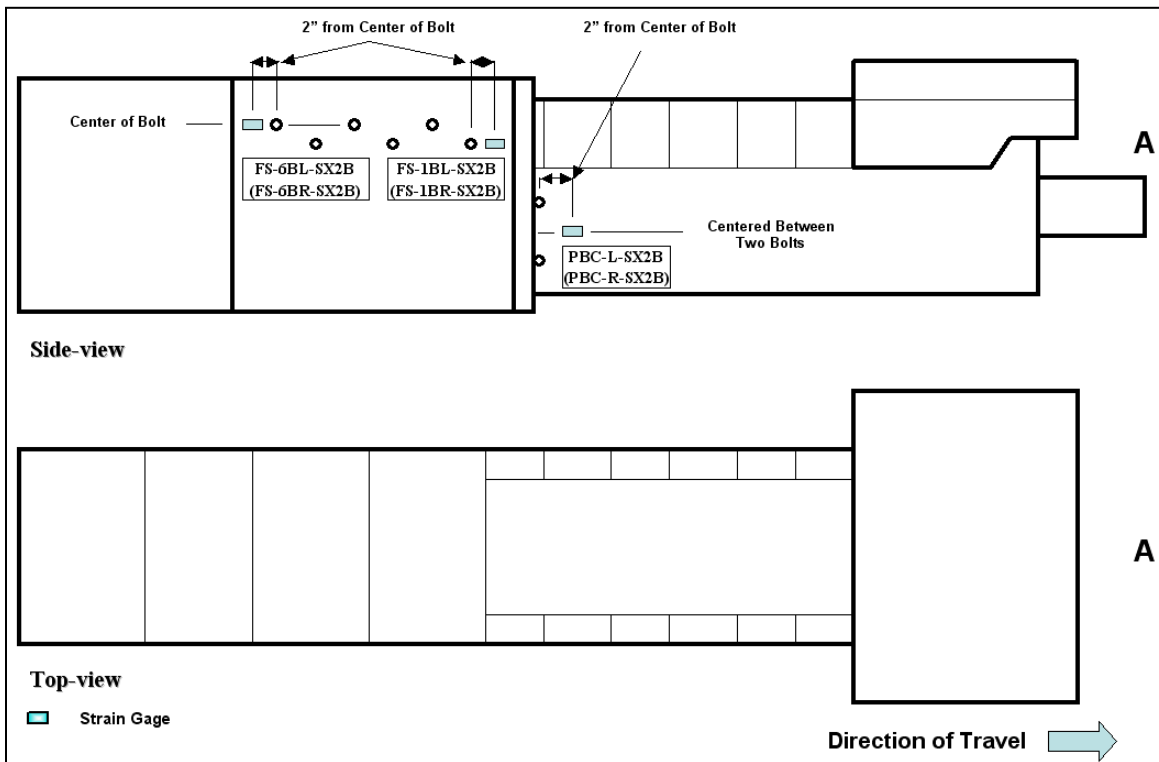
Strain Gauge Layout on Car 244 (Leading) End Fixed/Sliding Sill
